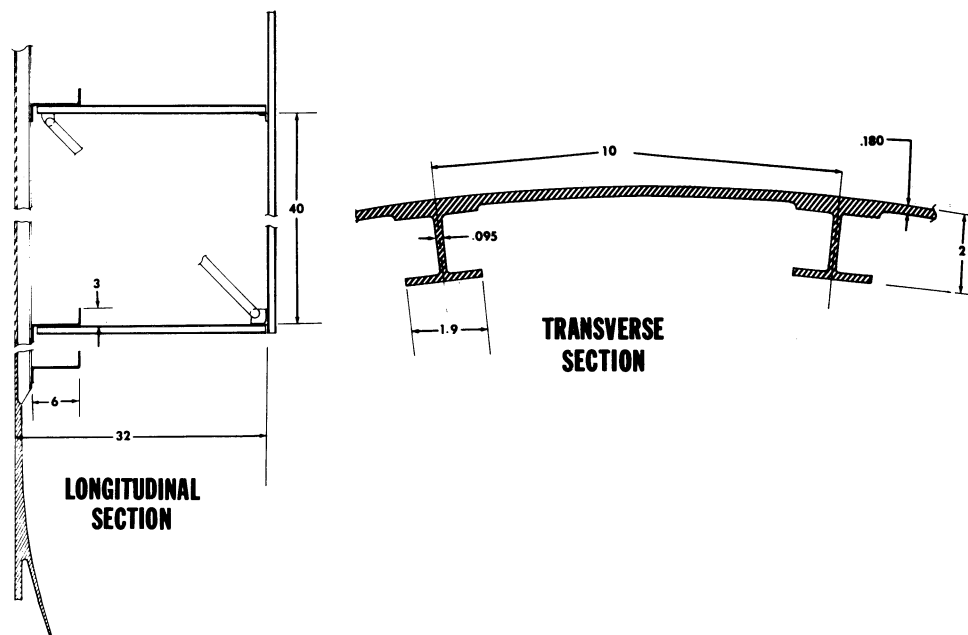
Cross-sections of the C-5 Booster tank assembly.
